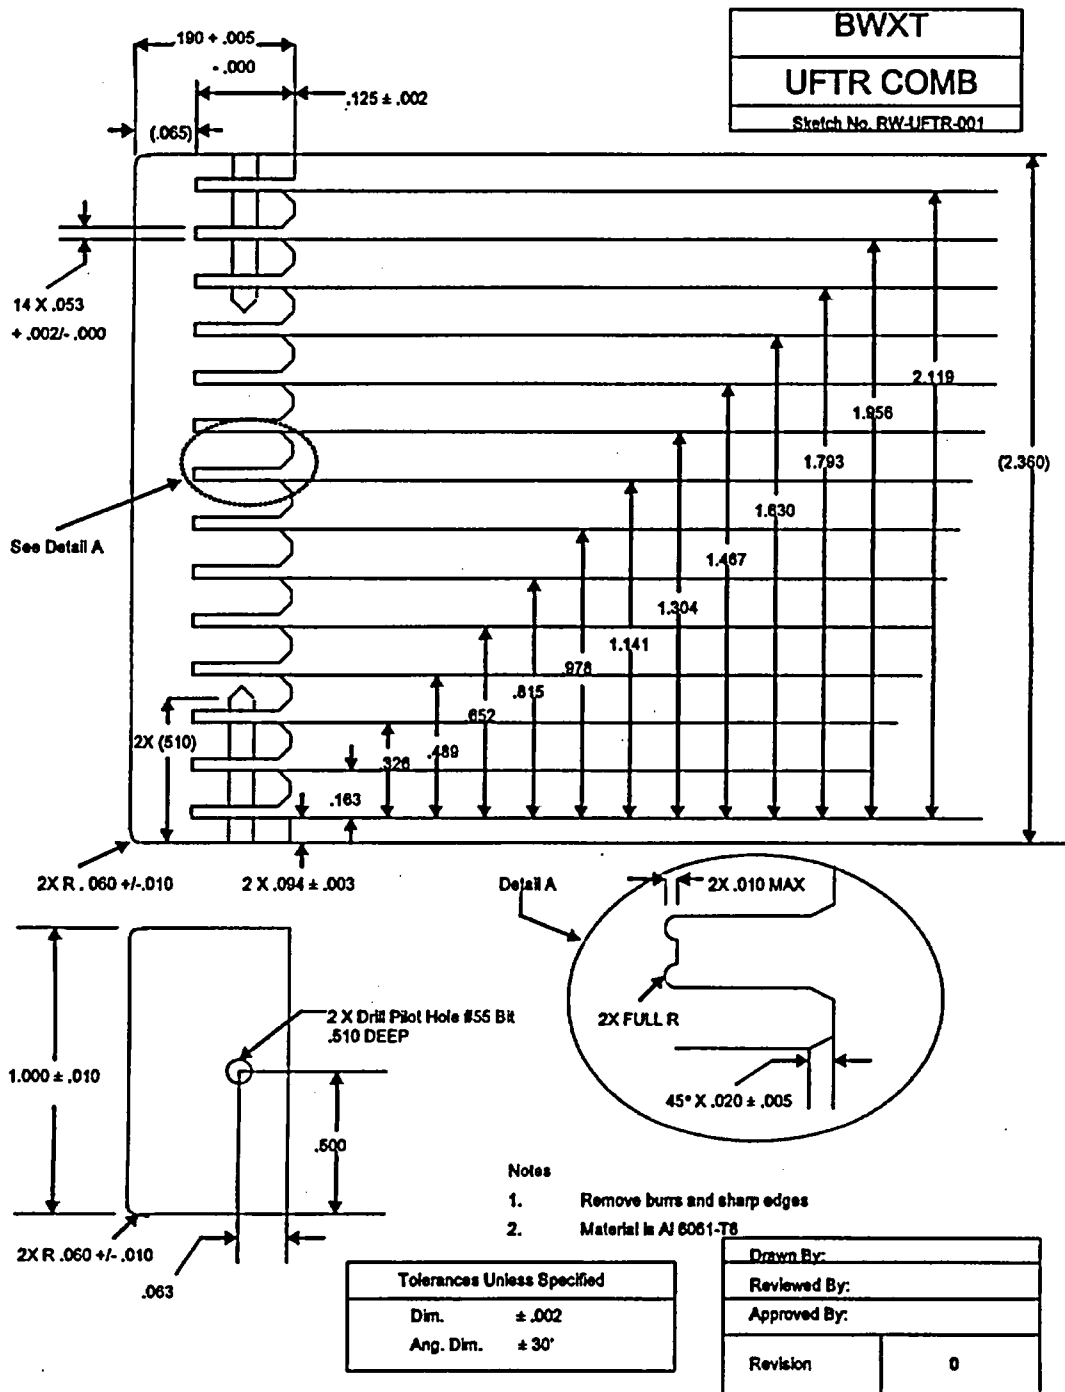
Modified fuel assembly design by BWXT to include the “comb” design
